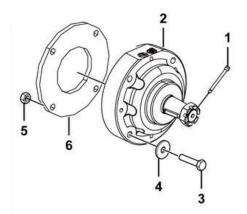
Brake Disc and Tire 1. Pin 2. Brake disc 3. Bolt 4. Washer 5. Nut 6. Flange
